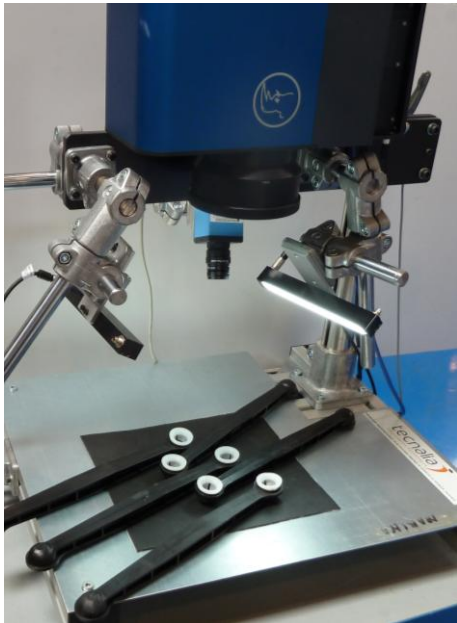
Functional prototype of machine vision system in a scanner-based laser polymer welding setup to weld five arbitrarily arranged white plastic rings
